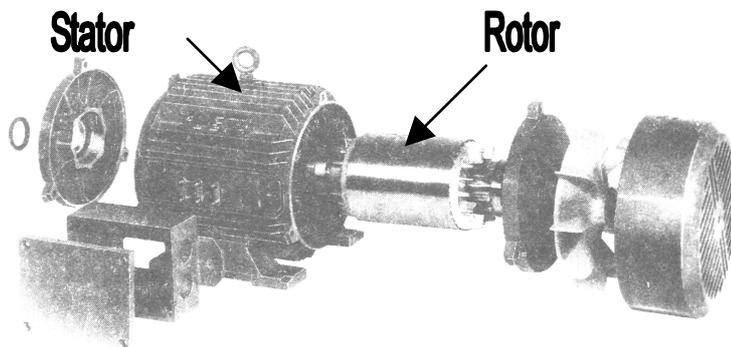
Exploded view of a Squirrel Cage Induction Machine.
